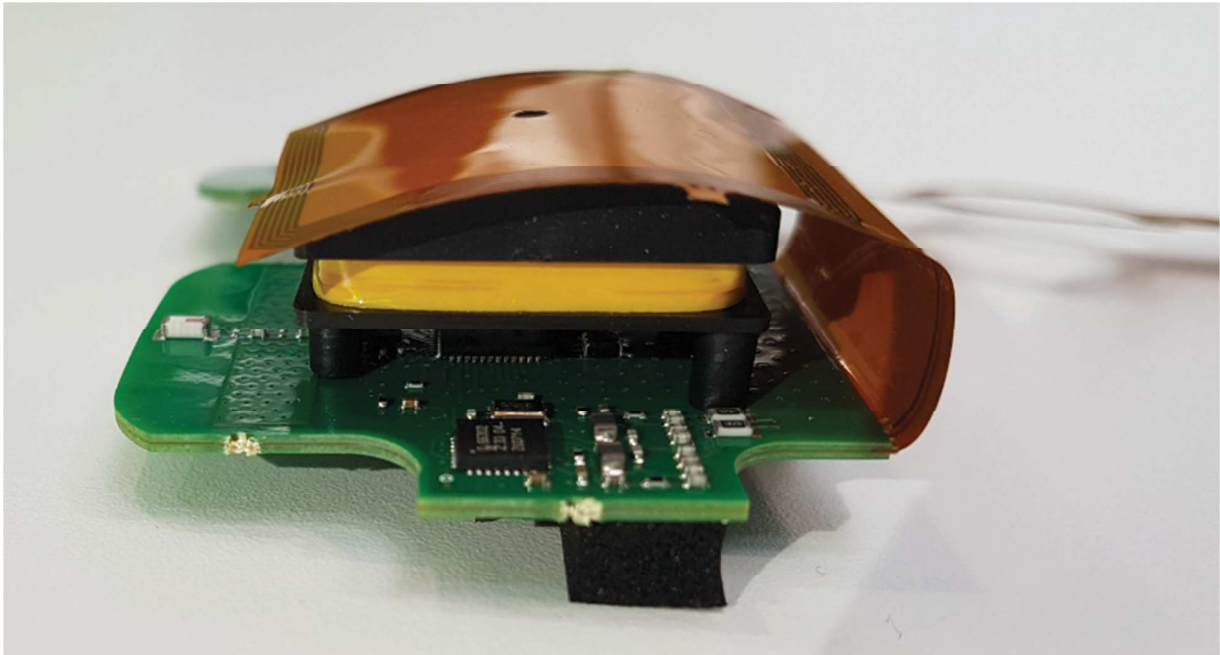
Side view of Radio Module and flexible PCB with radio coil
